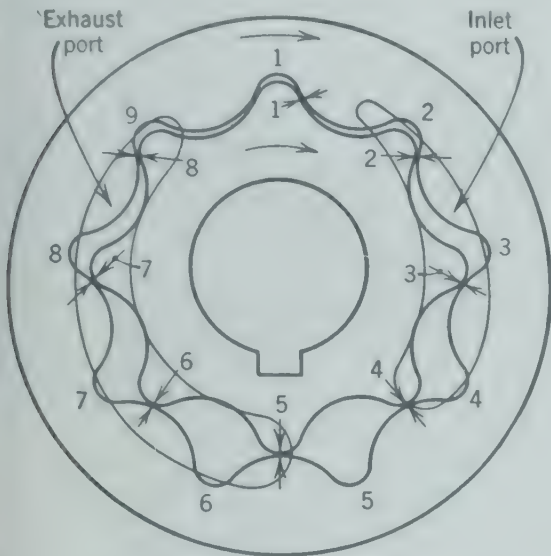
shows an internal gear pump where two gears maintain a continuous series of sliding seals with each tooth, forming the pockets entirely between the gears. This type of pump may have
